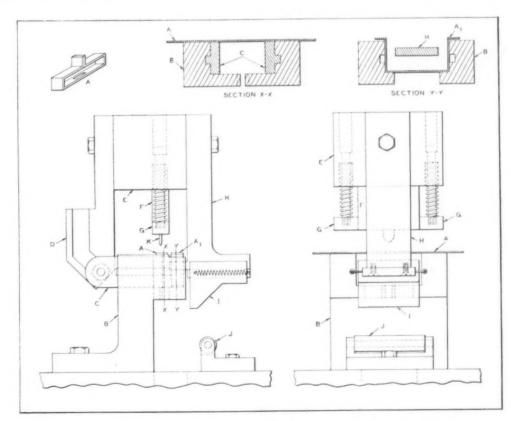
Die Designed to Produce Completely Formed Part Like One Shown at A at Each Stroke of Press
